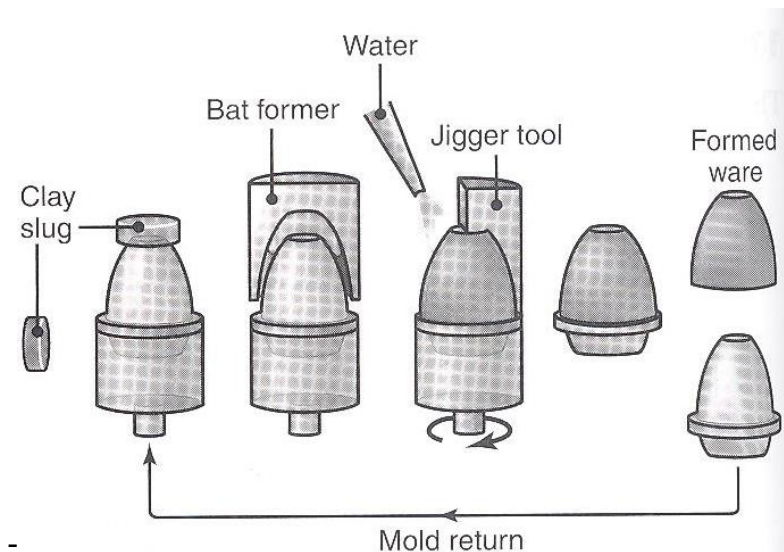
Schematic of jiggering (forming) process. A clay slug is placed on top of a mold base and then compressed to fit the mold. Subsequently, the jiggering tool is used to shape the final part. The process is repeated until the part reaches its final shape and thickness [15].
